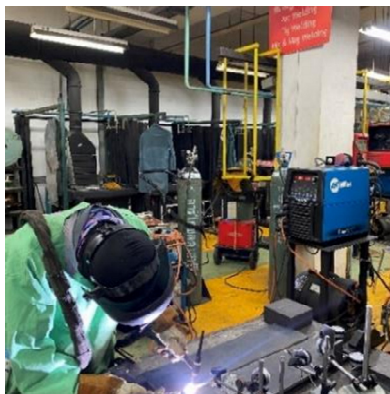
GTAW-SMAW hybrid welding process on the root pass.
